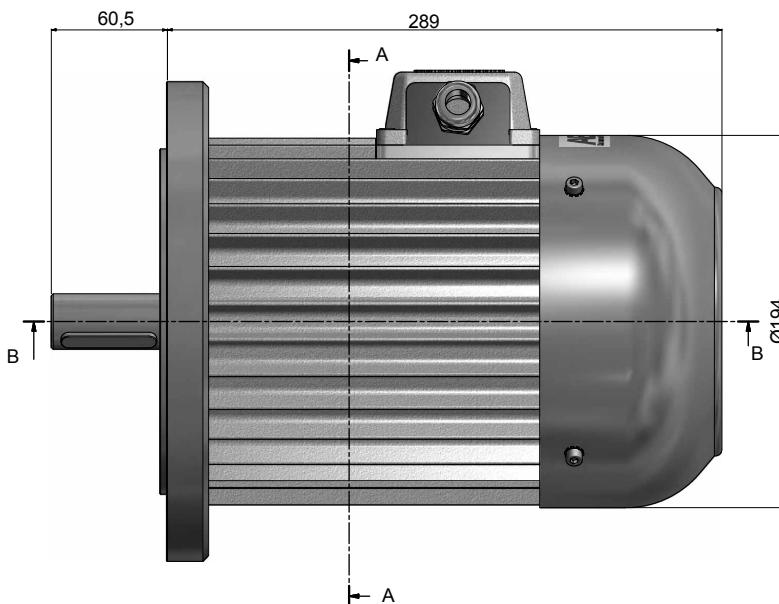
Side-view of electrical machine B with dimensions and cross-section indications.
